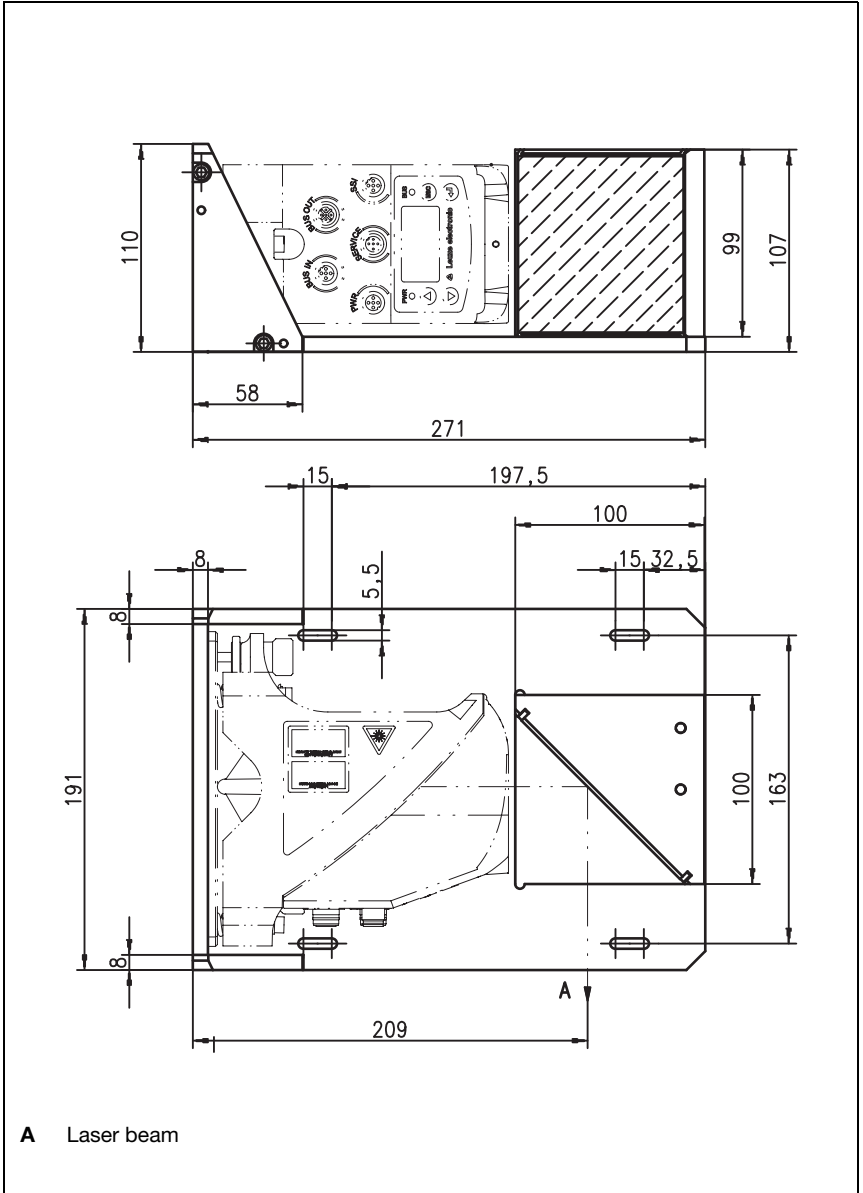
Dimensioned drawing of US AMS 01 deflector unit
